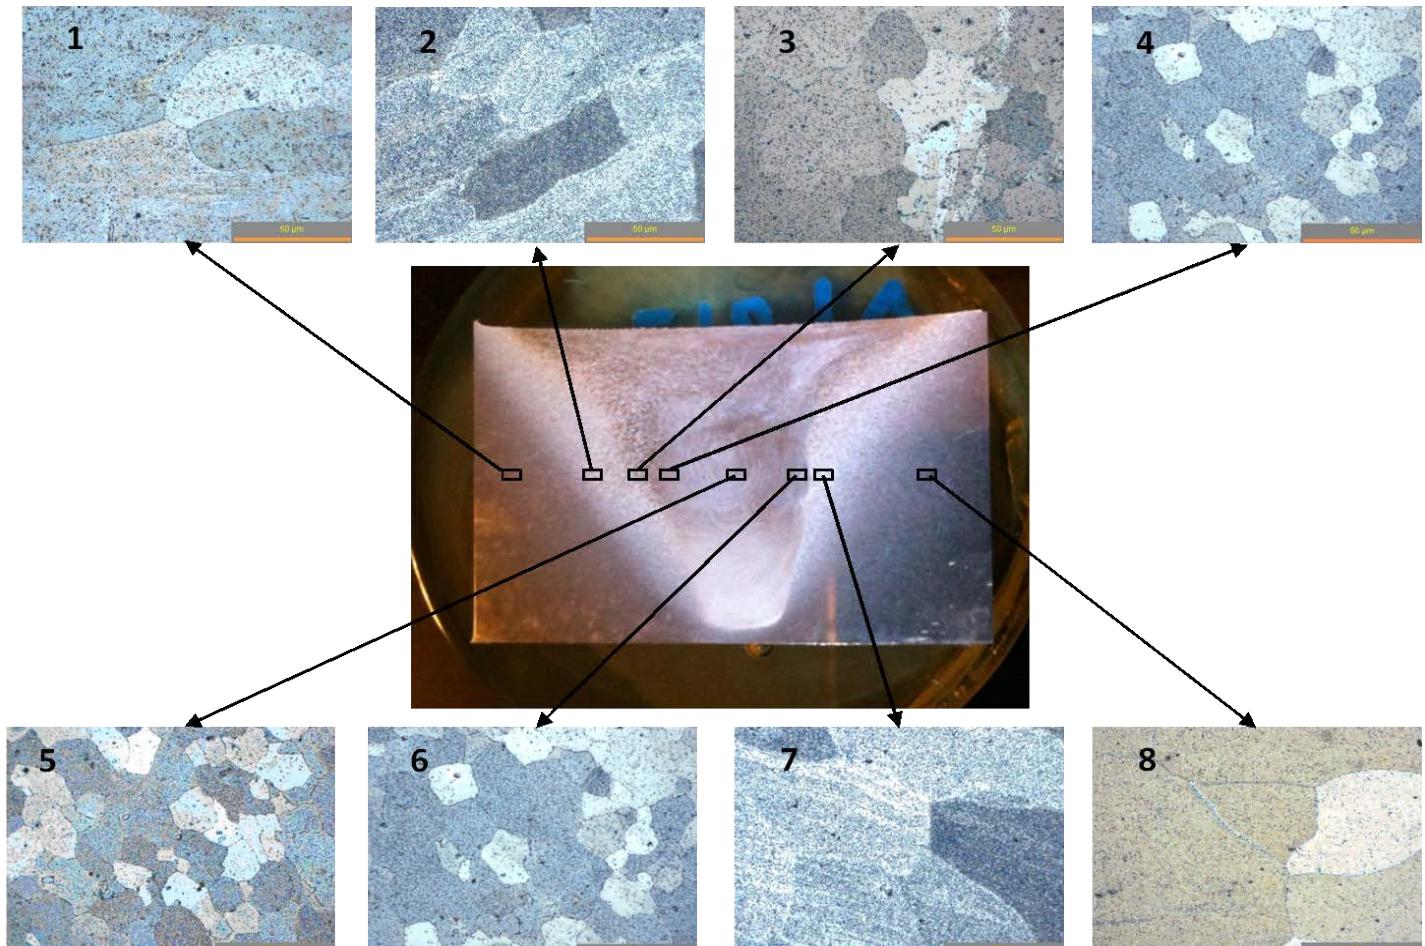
Microscopic Views of 2139 FSW Joint.
